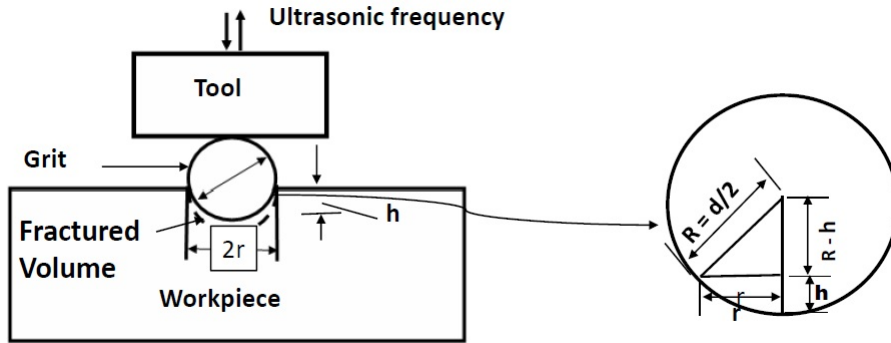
Development of fracture in the workpiece due to hitting by an abrasive by hammering.
